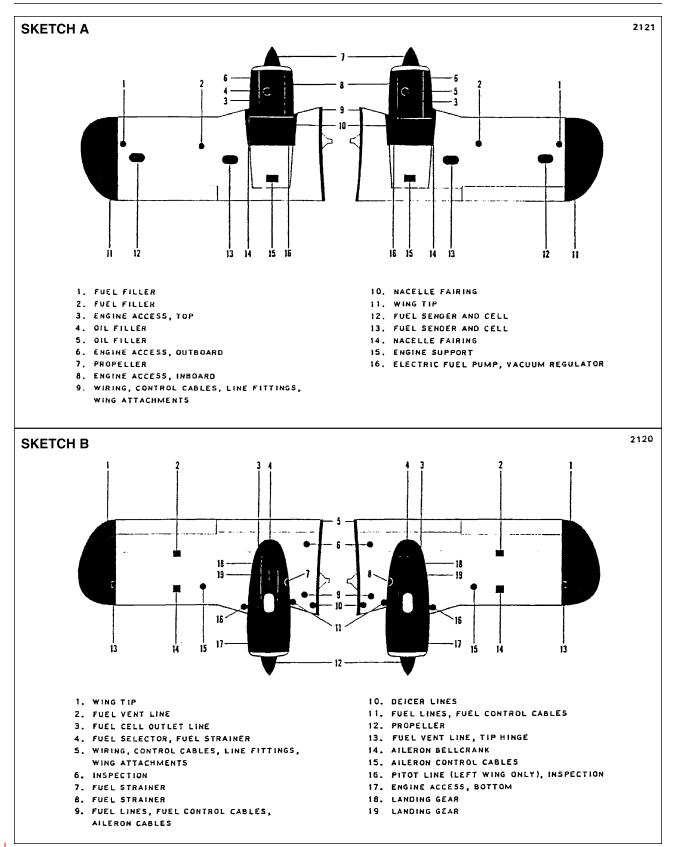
Access Plates and Panels PA-23-235 and PA-23-250 (Sheet 2 of 4)
